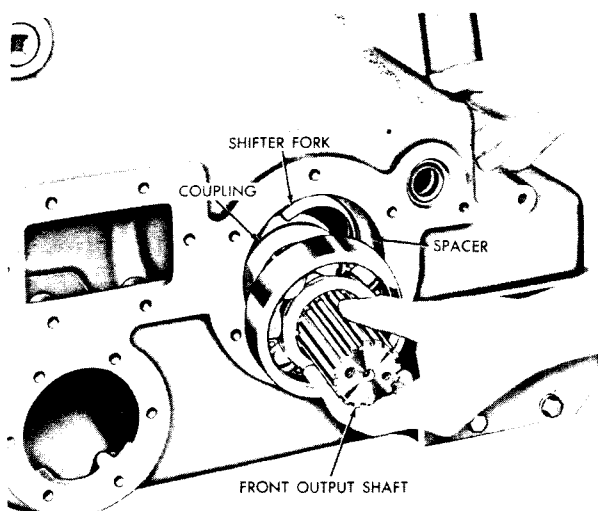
Installing (or removing) front-output shaft and related components S2505
